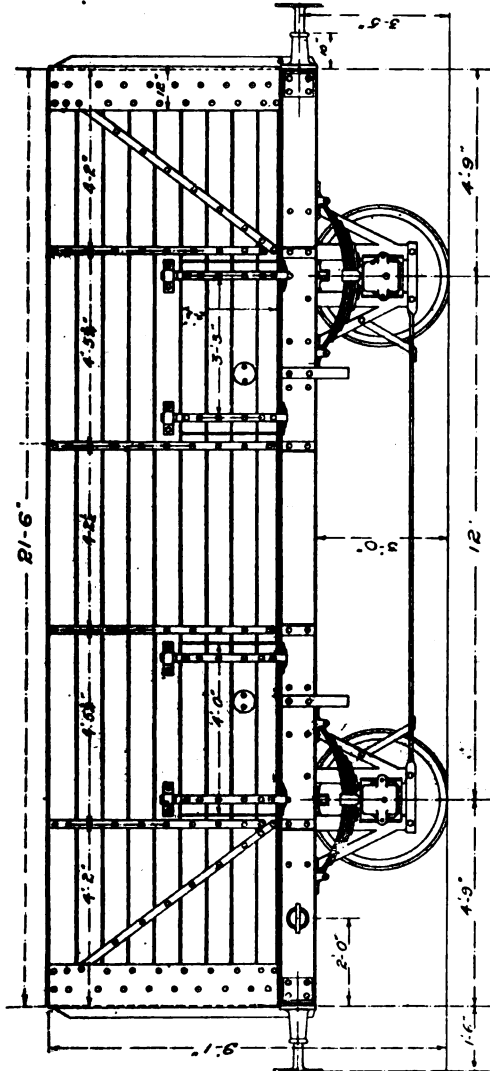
ELEVATION OF 20-TON PRIVATE OWNERS' OPEN GOODS WAGON.
